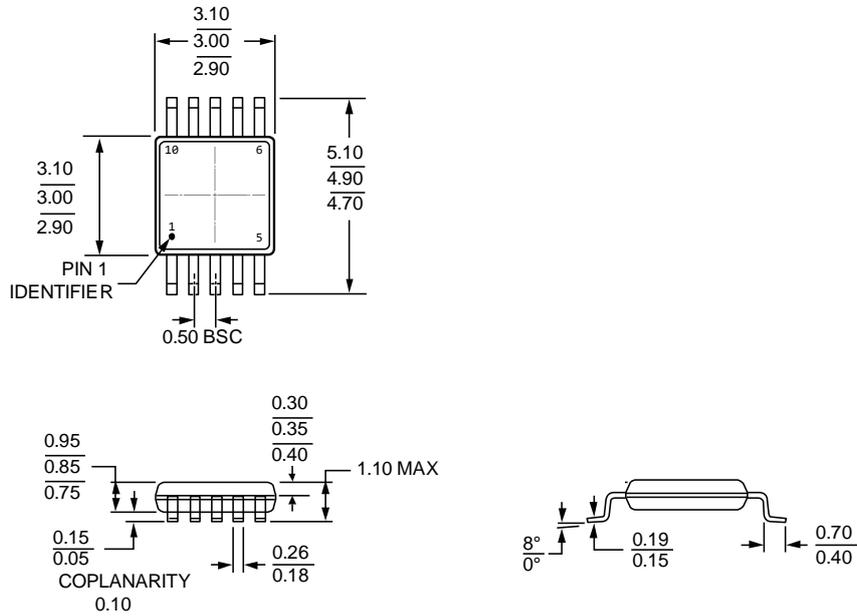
10-Lead MSOP Package Dimensions Shown in Millimeter
